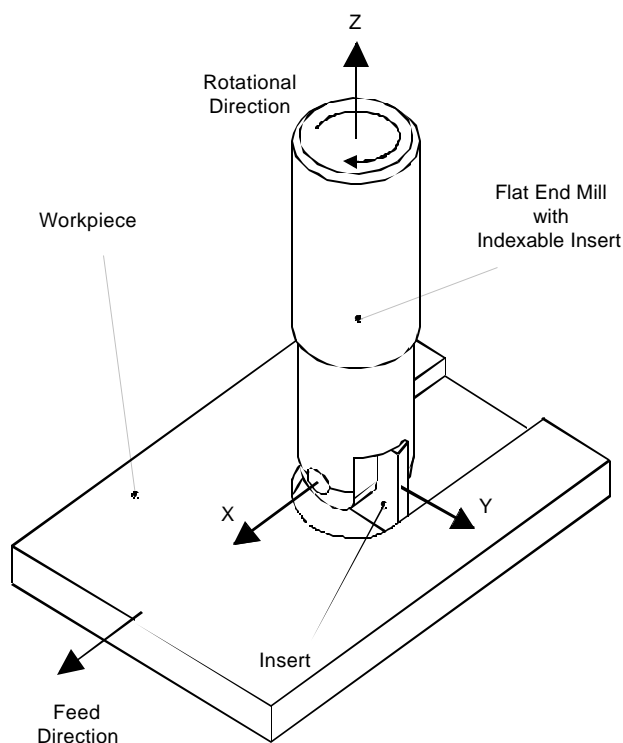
Schematic for slot milling using flat end mill inserts with nose radius
